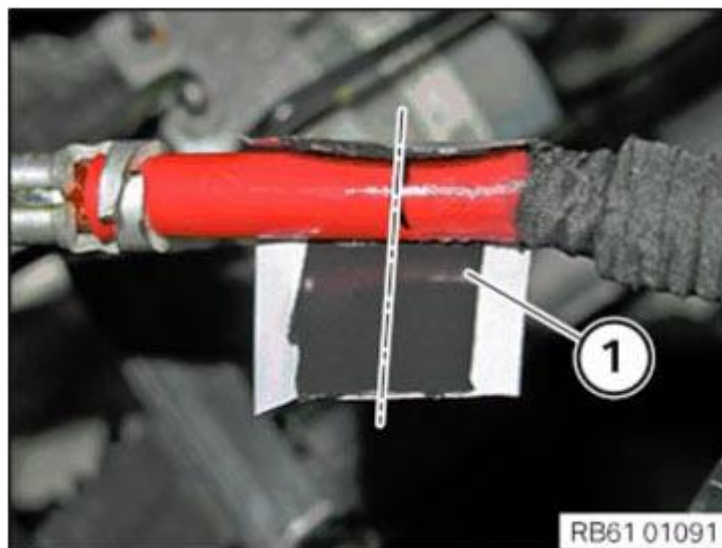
Identifying Mark Positive Battery Cable On Both Sides
